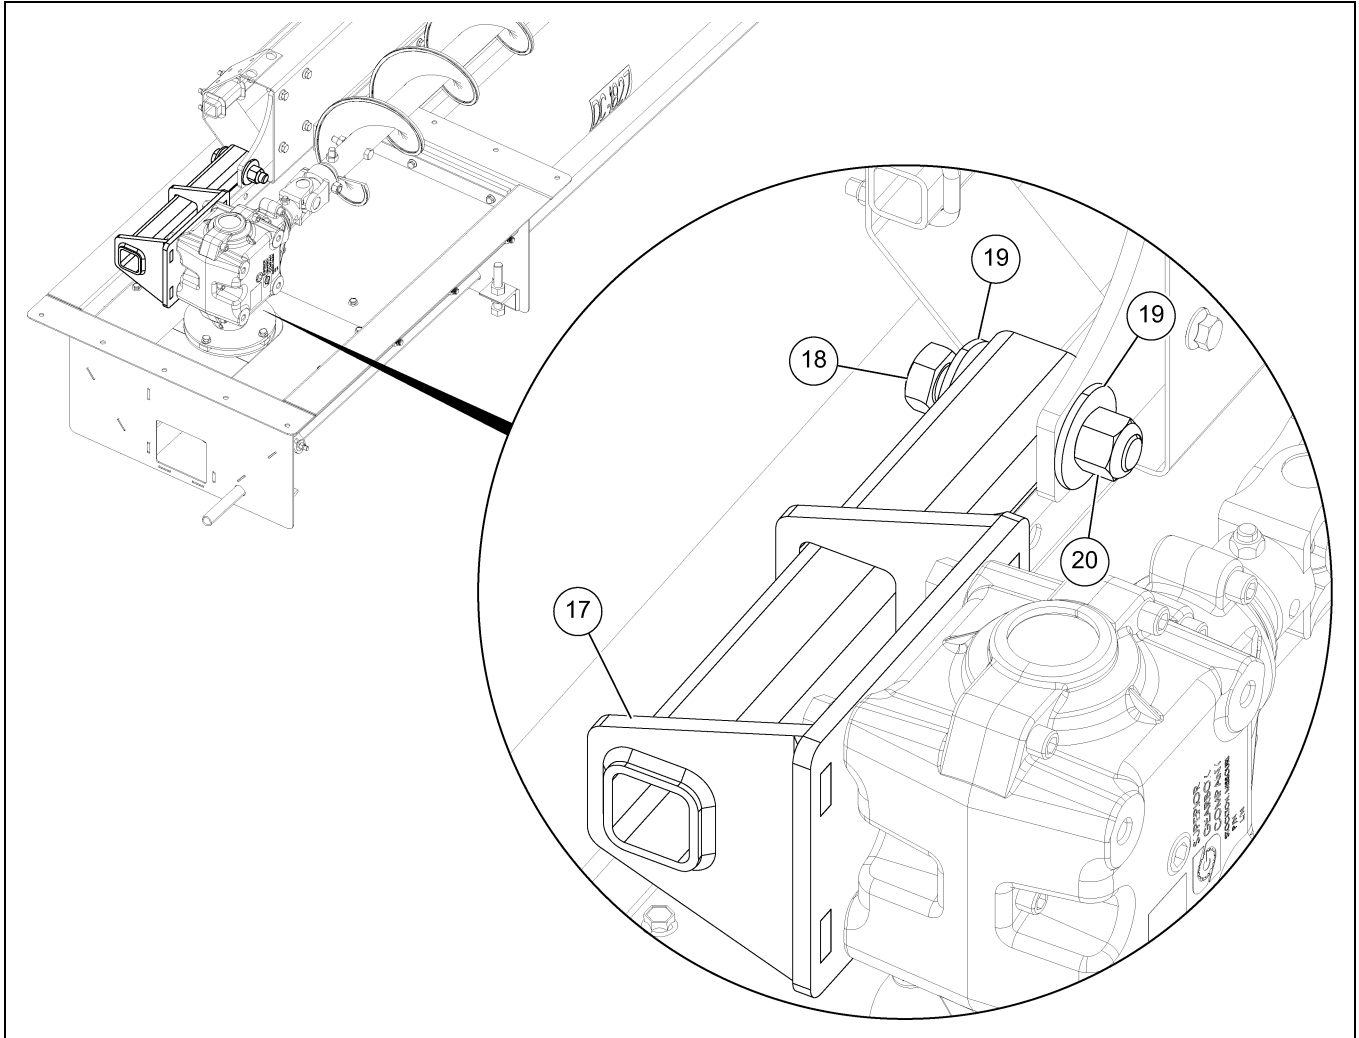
Adjusting the Center Pivot Bracket Bolt
